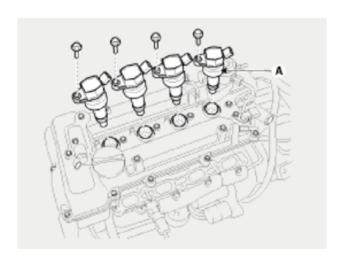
Identifying Ignition Coil With Mounting Bolts Courtesy of HYUNDAI MOTOR AMERICA
